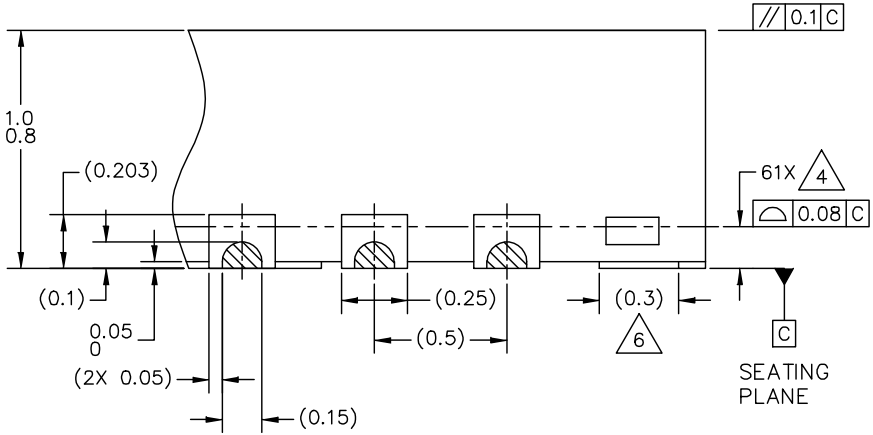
Package outline HVQFN56 (SOT684-29(D))
